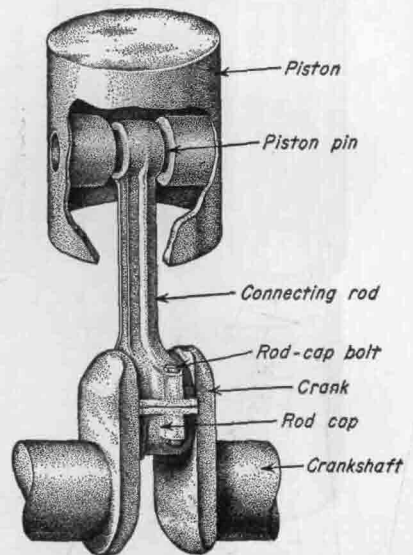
Piston and connecting-rod assembly attached to crankpin on crankshaft. Piston is shown partly cut away so you can see how it is attached to connecting rod.
